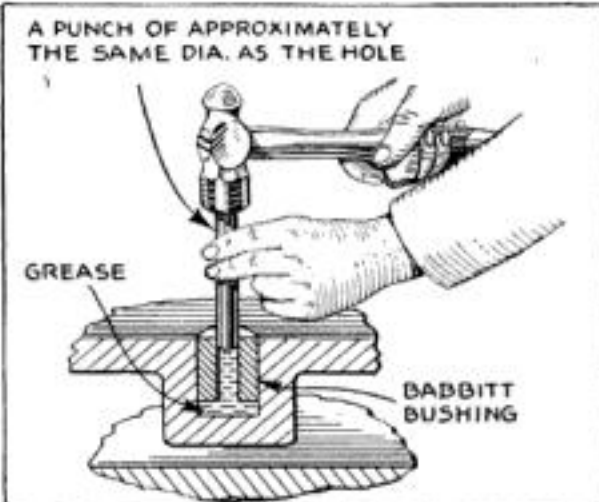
By filling with grease and using bolt, bushing in blind hole can be removed.
